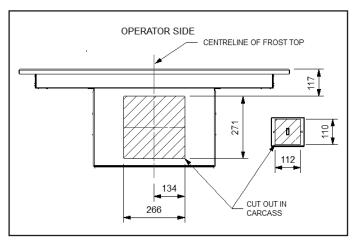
Diagram showing the cut out position for the fitting of the switch box and the air discharge grill (GRL204CS) on the operator side of the Frost top for Straight Through venting
